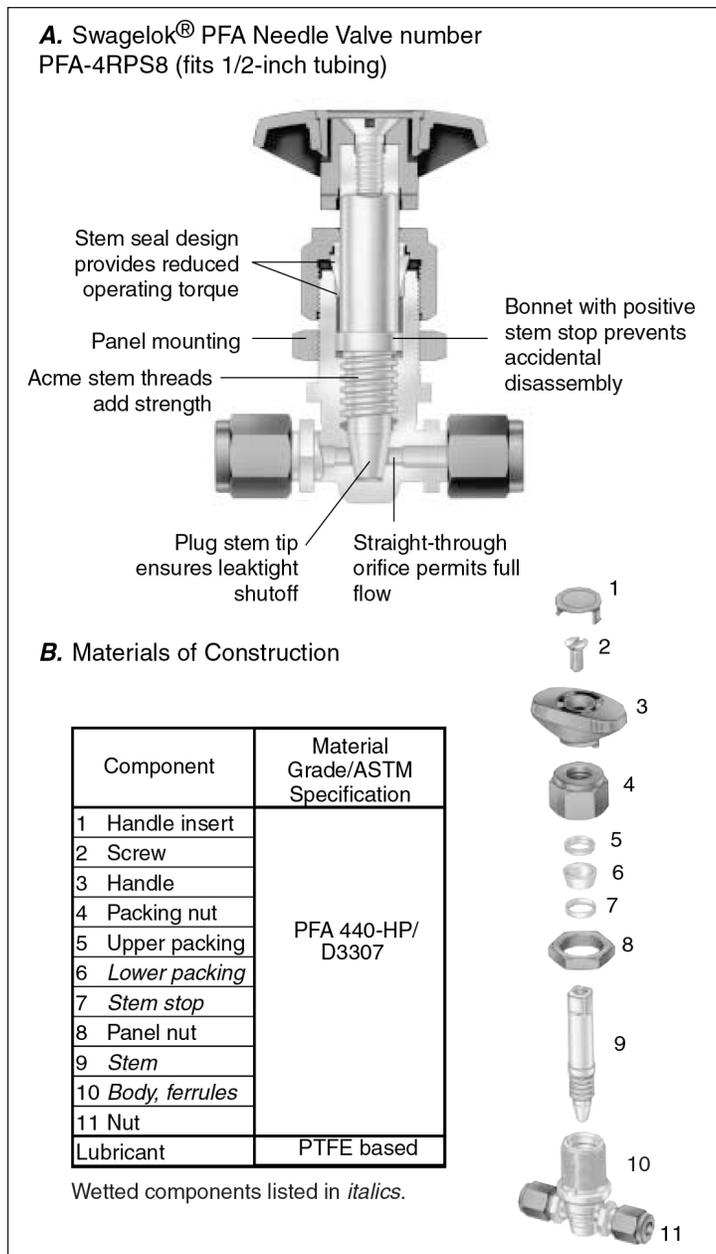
Swagelok® perfluoroalkoxy needle valve showing (A) front view and (B) exploded view.
